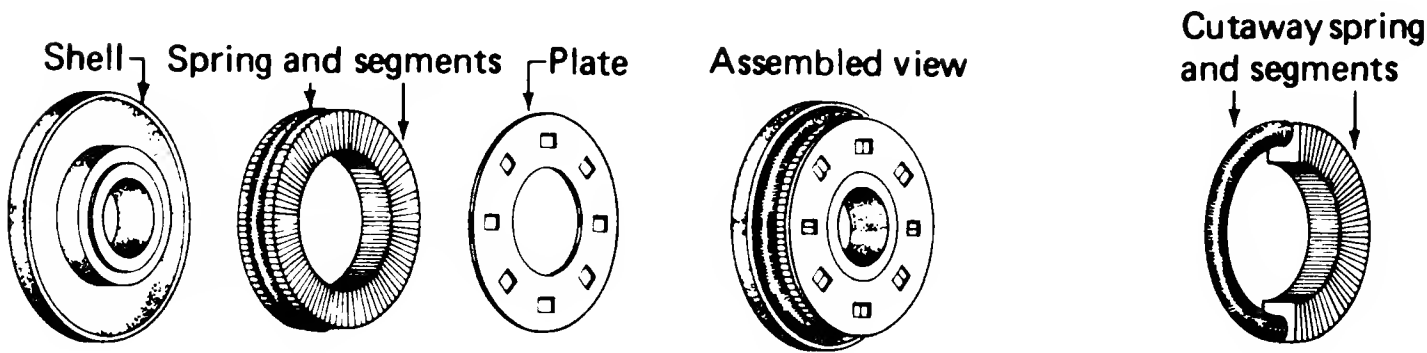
An exploded view of the rotor of a repulsion-start, induction-run motor, showing the short-circuiting and brush-lifting mechanism.
